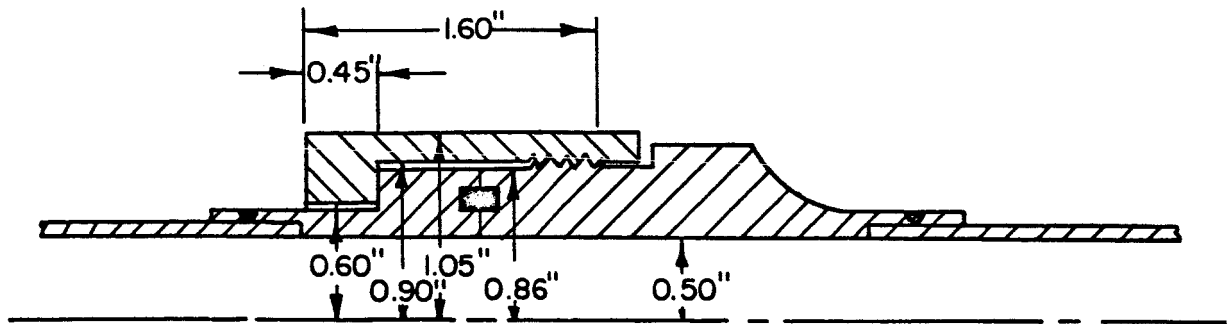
THREADED-CONNECTOR GEOMETRY
